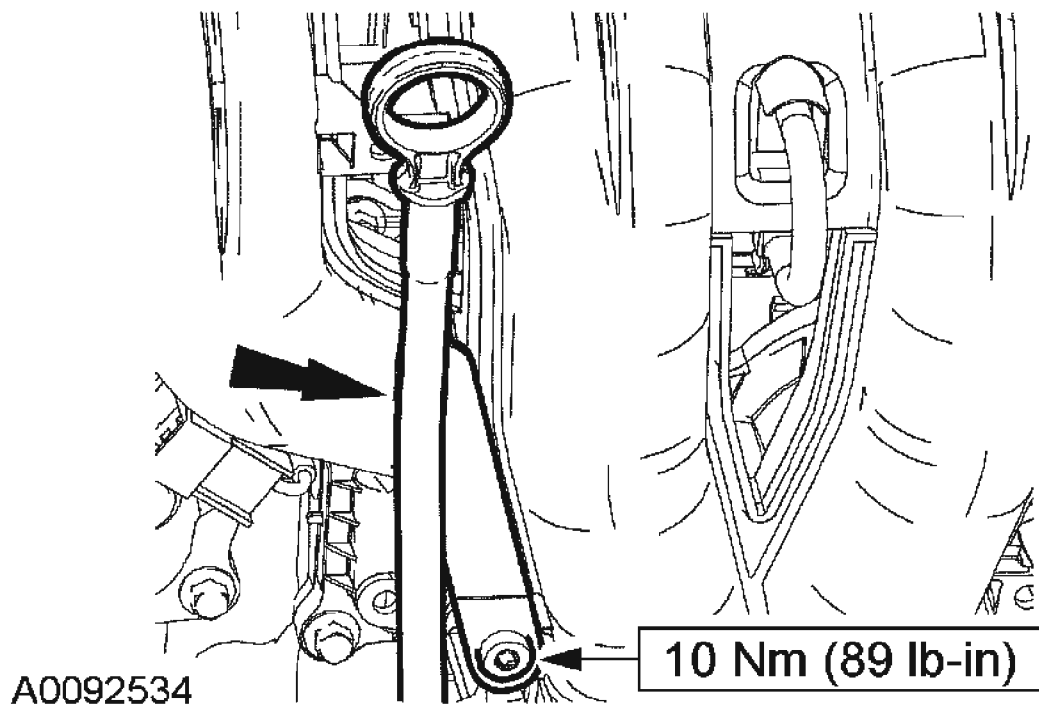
Installing Oil Level Indicator Tube Assembly And Bolt
